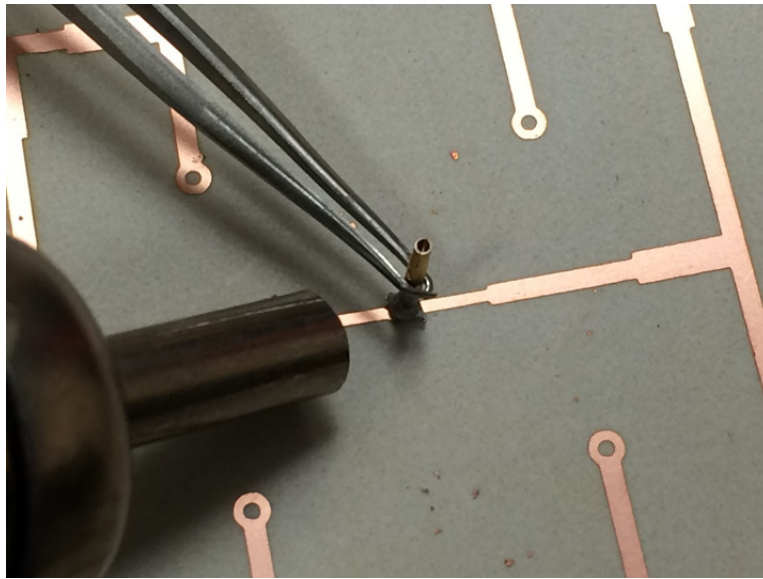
Soldering the SMA pin using solder paste and hot air gun.
